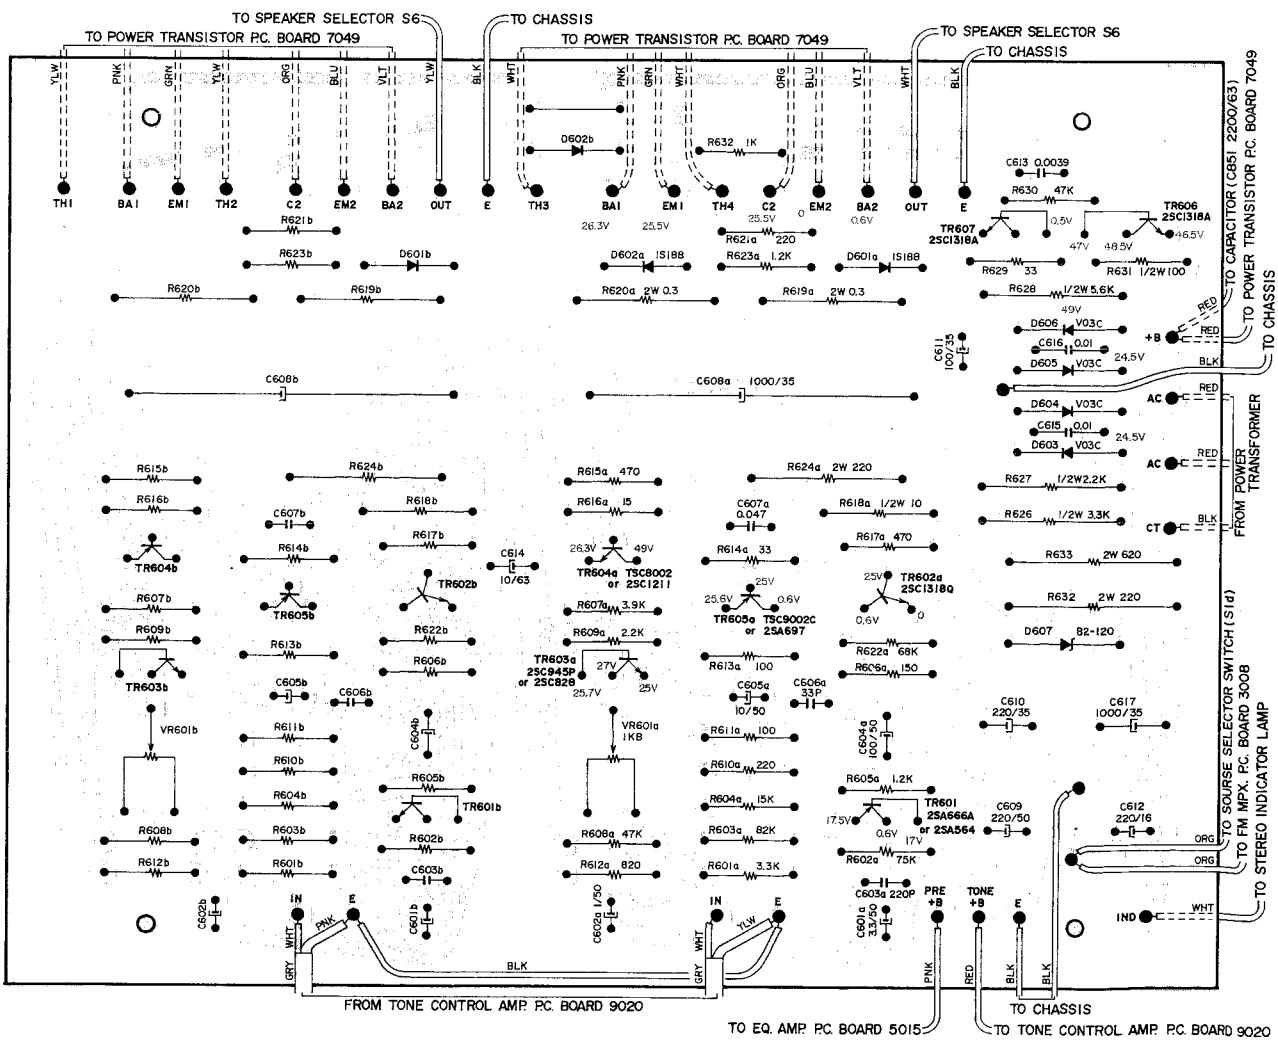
POWER AMP. P.C. BOARD 6023 (Reverse Side)
